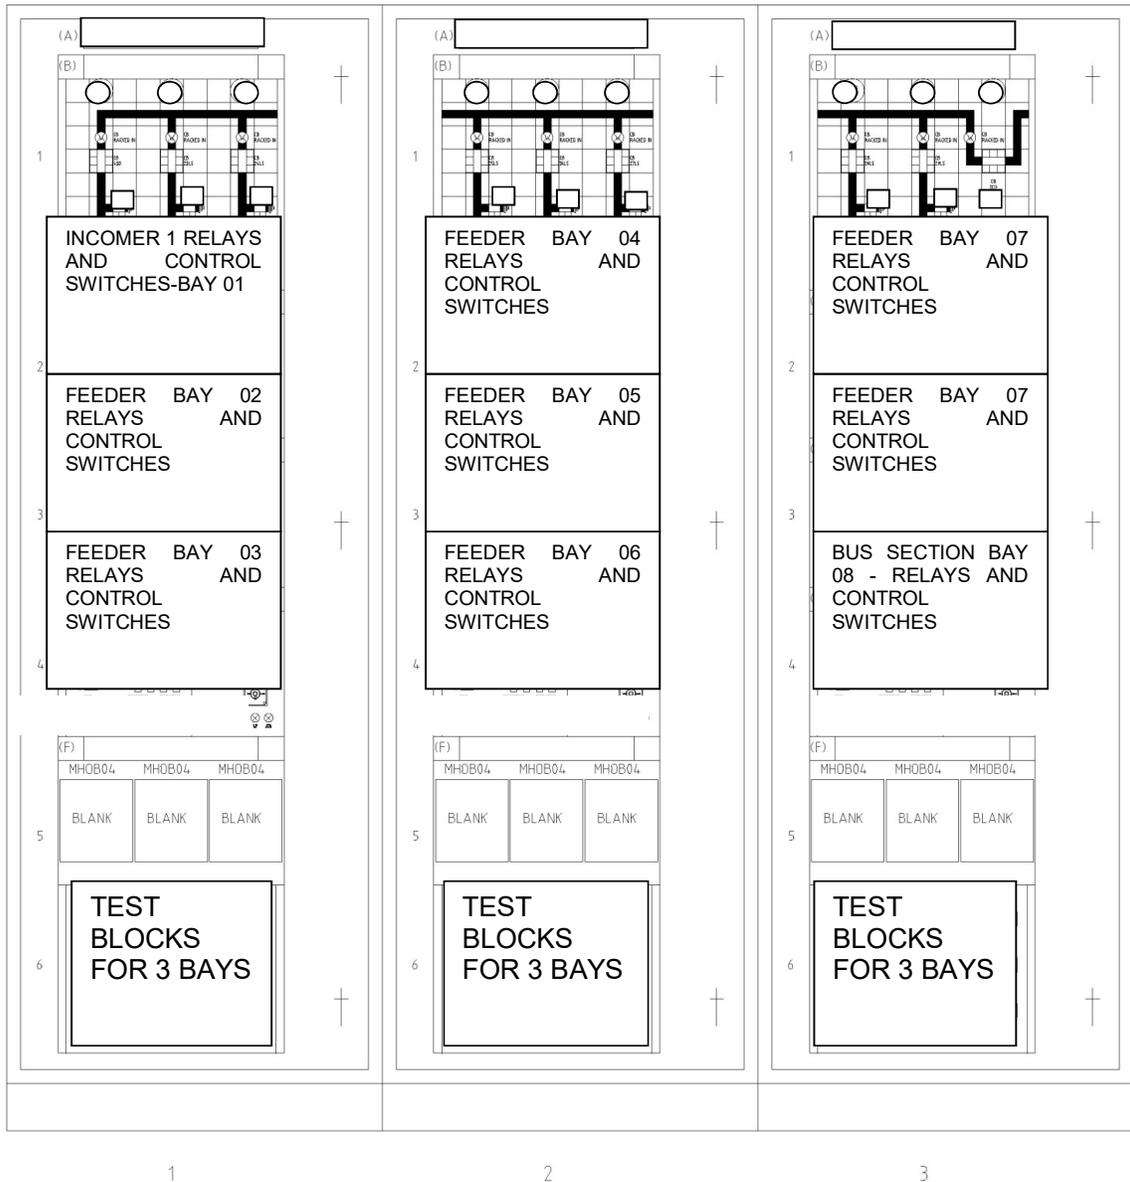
Typical tiled mimic layout detail for 11-kV Feeder Board Protection and Control Panels
